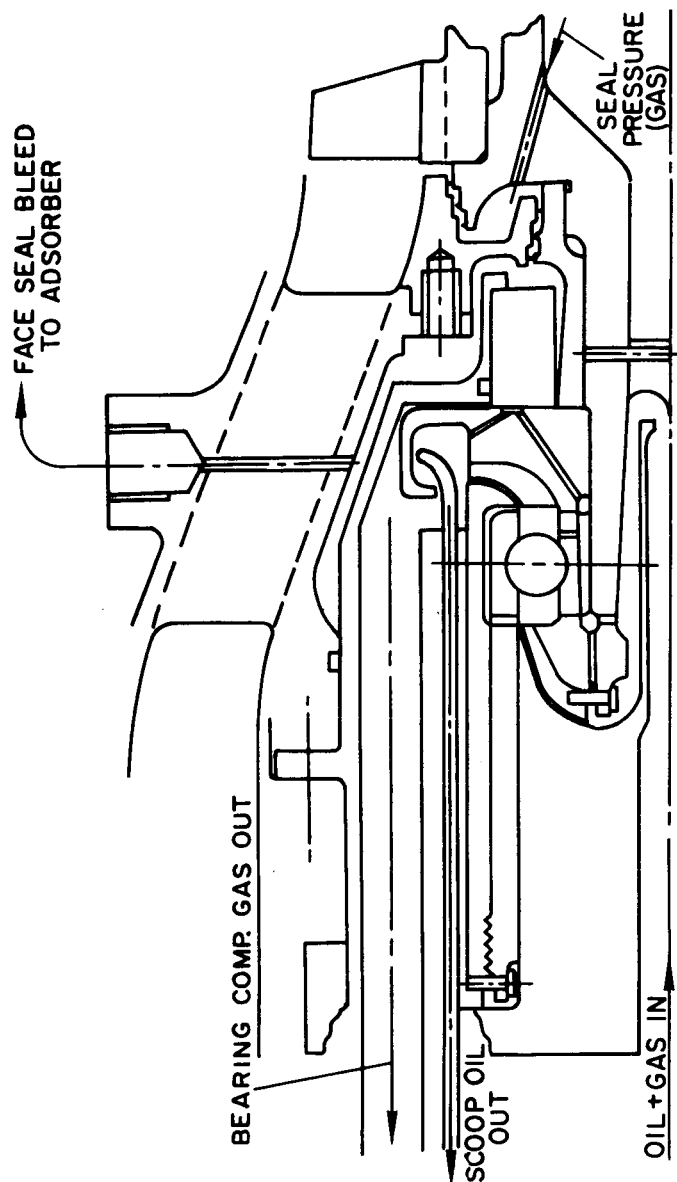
Preliminary Arrangement of Turbine-Compressor Bearing Cavity with Scoop Scavenge Concept
